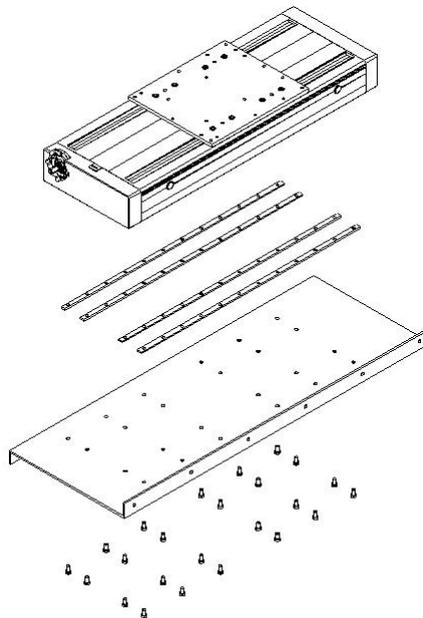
linear unit LES 4, 5, 6 for rack mounting
